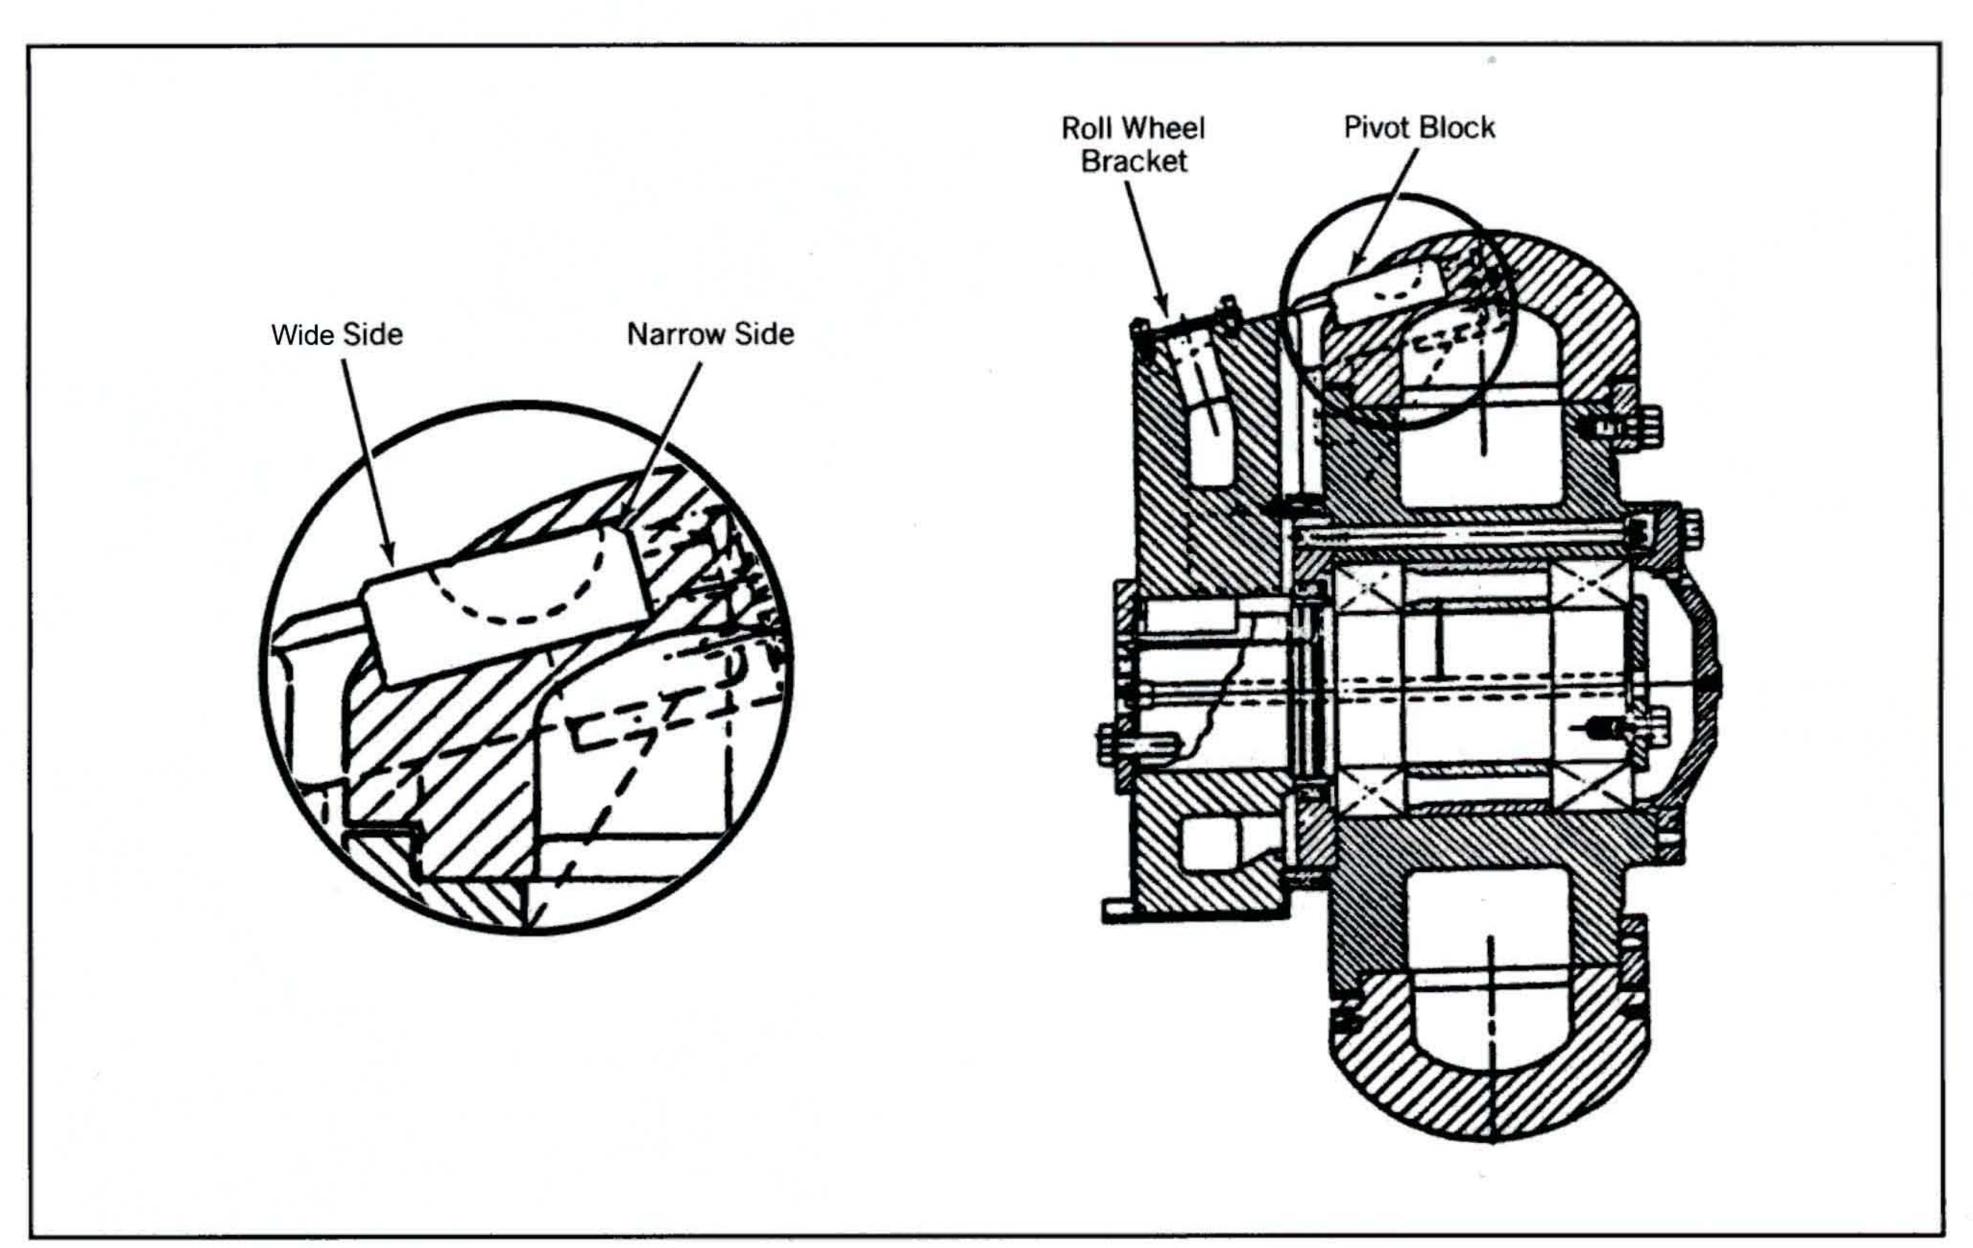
Proper orientation of the pivot block inside the MPS roll wheel assembly.
